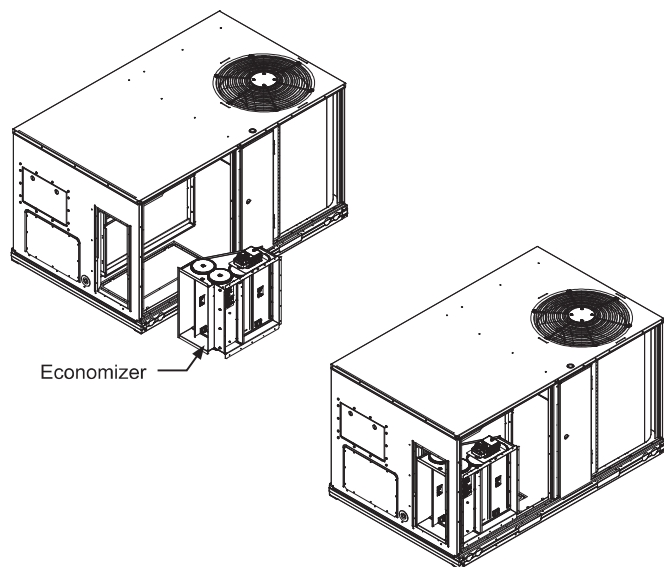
Typical Installation of Economizer Assembly Chassis 3/4 Shown
